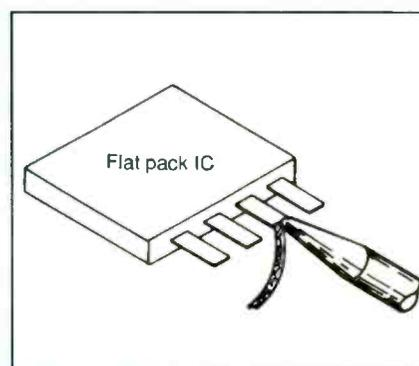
Install the new flat pack over the print pattern and solder one pin only.
